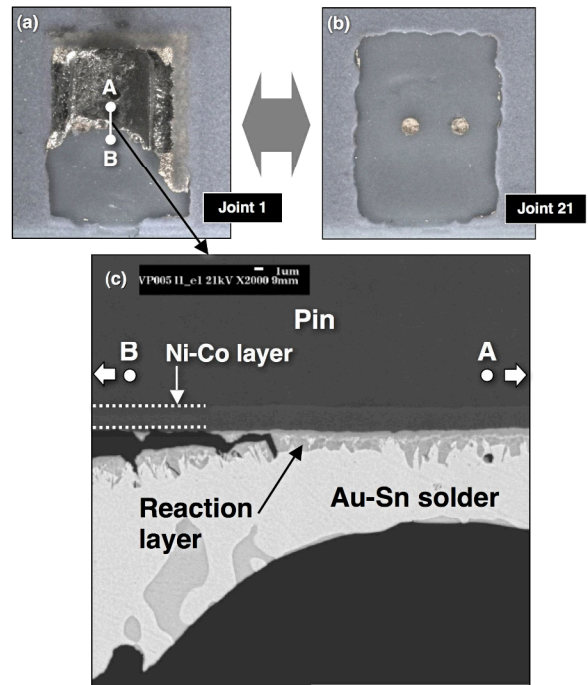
(a, b) Stereo photographs of pull tested, pin solder joints on a unit made by an alternative vendor, showing the two failure modes: solder/pin separation and thick film/LTCC separation. (c) SEM photograph that captures the crack path when it did occur at the solder/pin interface.
